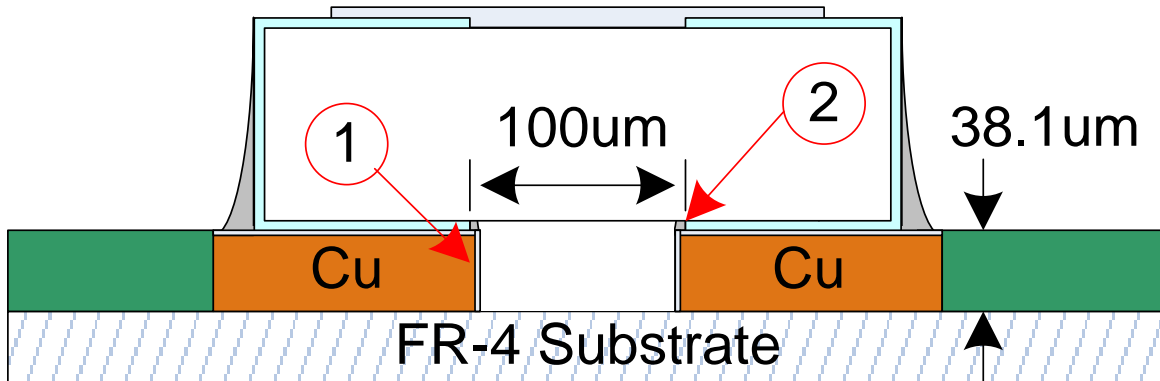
Cross Section of 0201 Chip w/ SAC Solder on Tin Plated Copper
